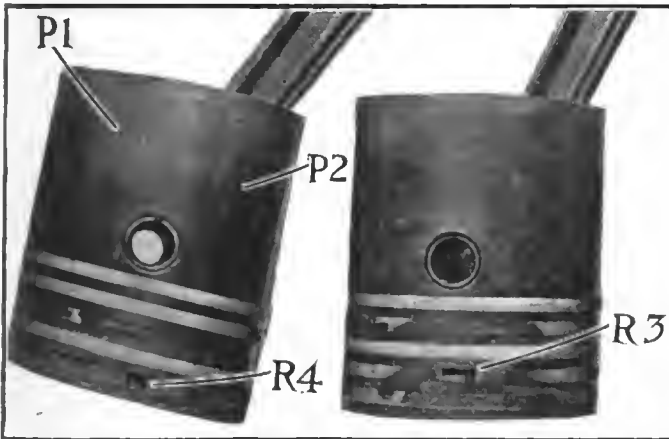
Reproduction of worn out piston and rings showing how piston deformed and the rings fractured because the space at the joint was insufficient.
